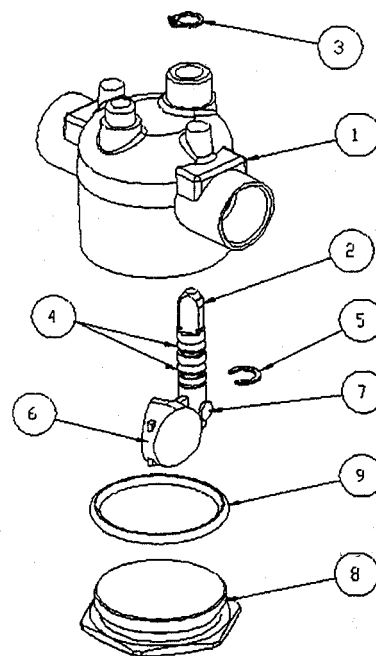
Schneider Electric PopTop 2-Position Valve Body Components (Shown: 2-Way).
